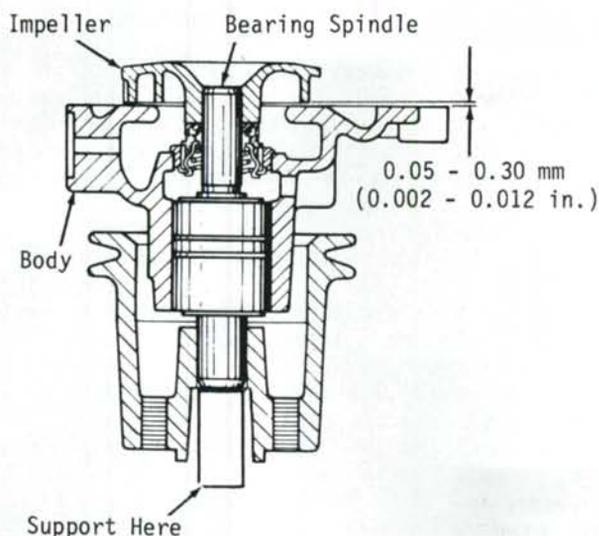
Support pulley end of shaft, then press impeller onto shaft until desired clearance between impeller and body is obtained.
